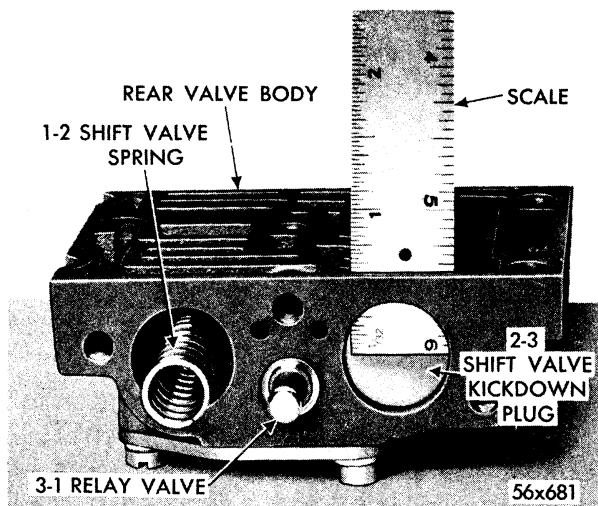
Using Scale to Hold 2-3 Shift Valve Kickdown Plug in Body During Assembly
